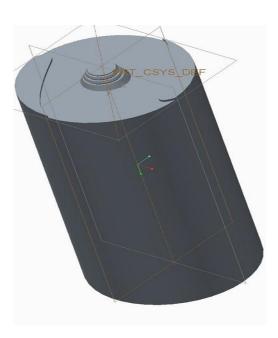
3D Model of Tapered Cylindrical Tool with Thread
